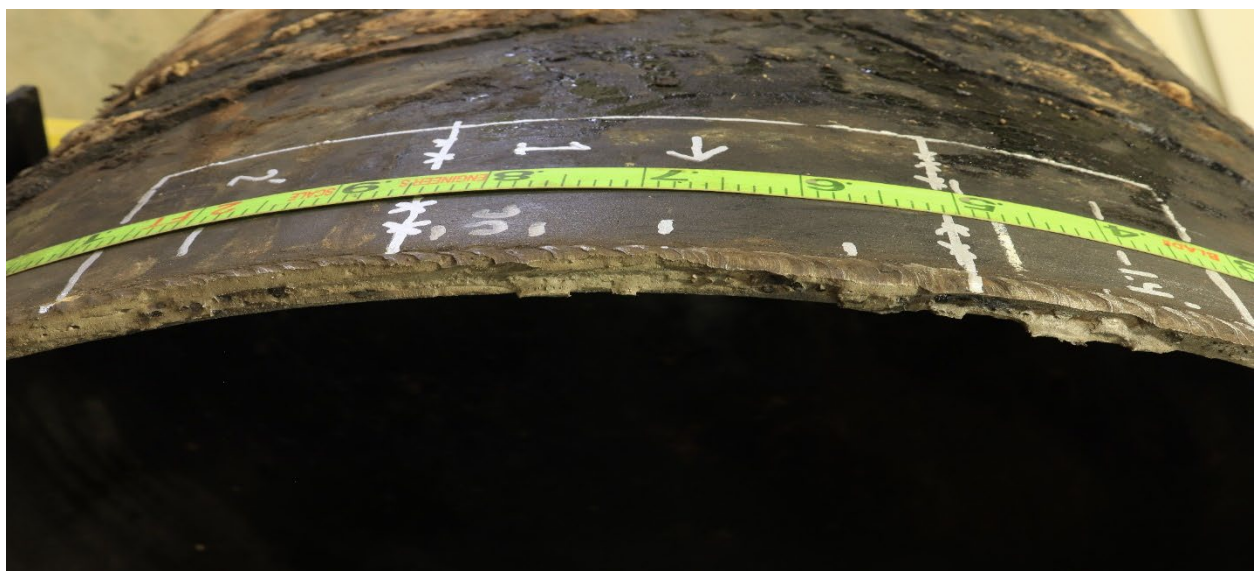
An area of the Pipe 1 fracture surface annotated for sectioning.
